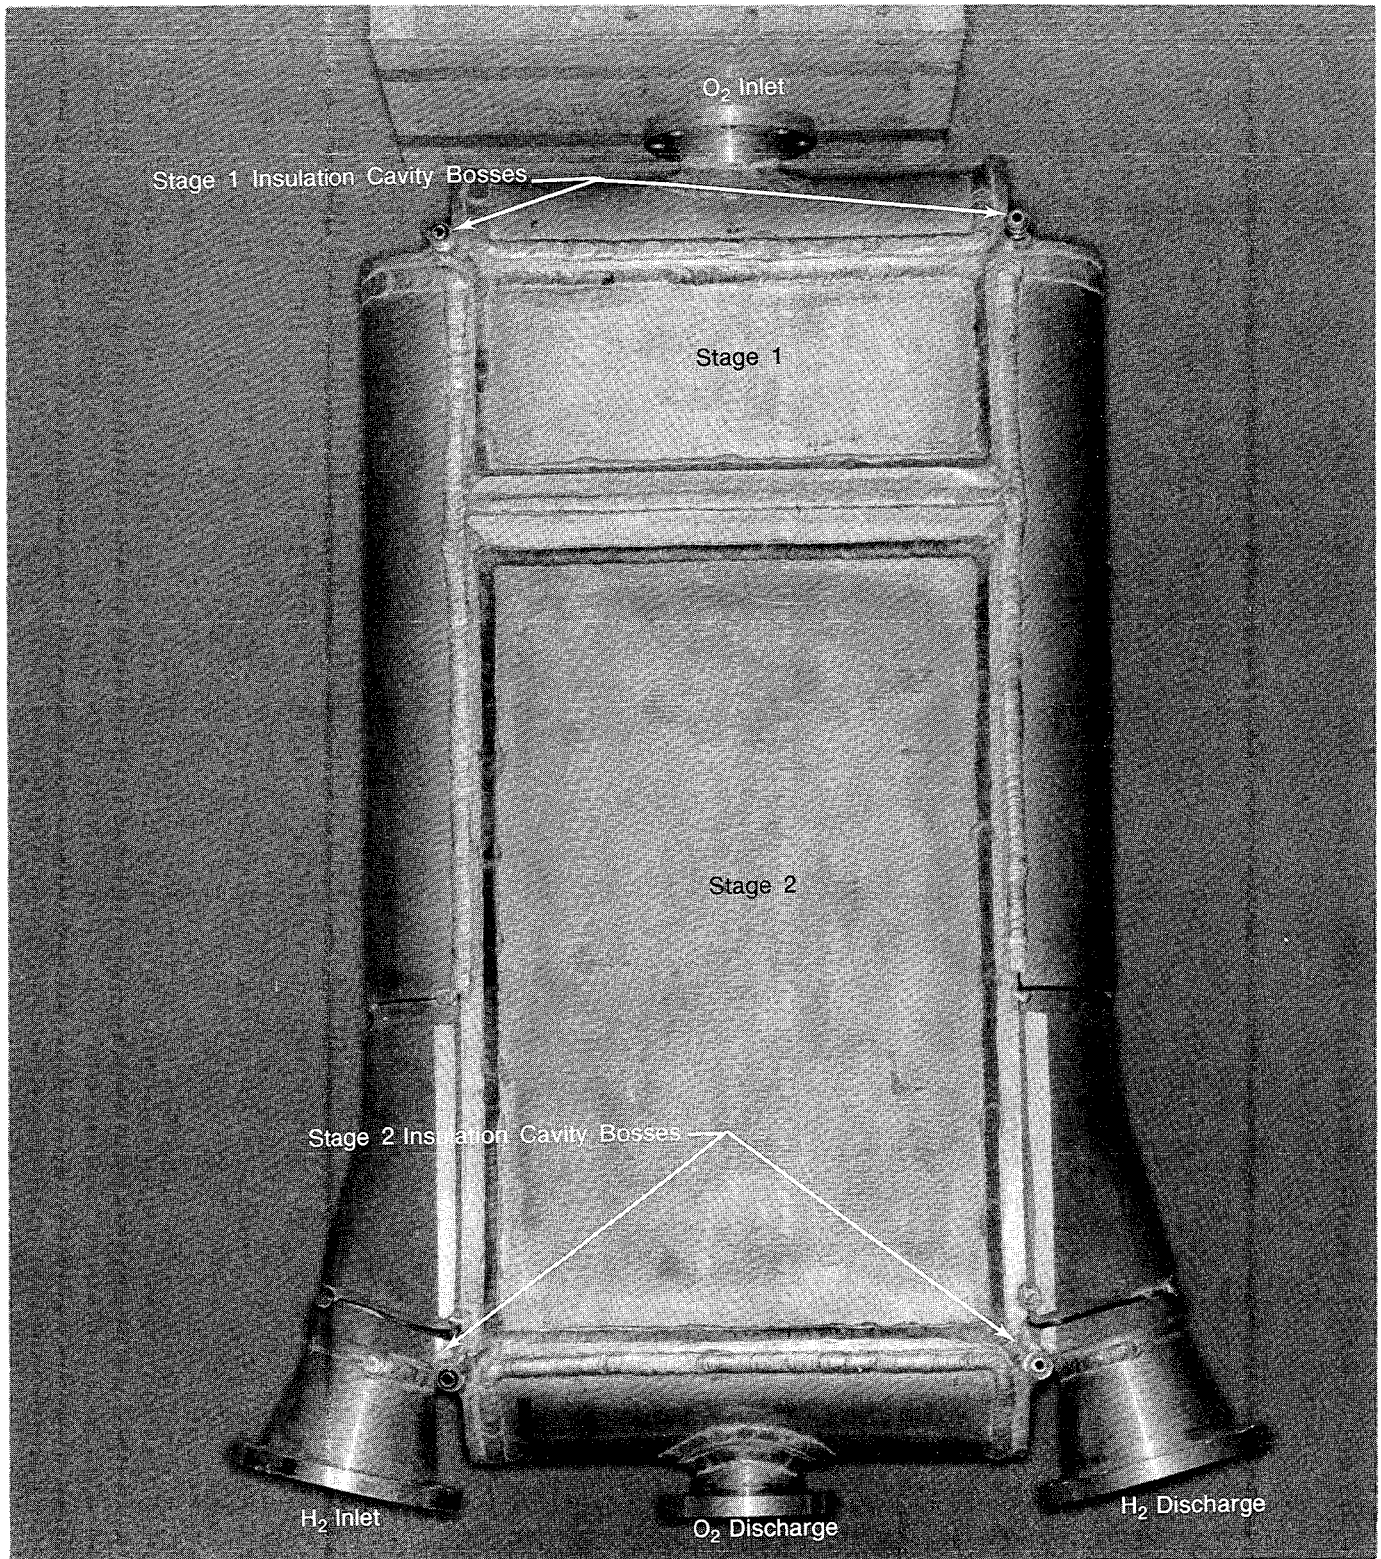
Oxidizer Heat Exchanger Stage 2 Weld Repair
